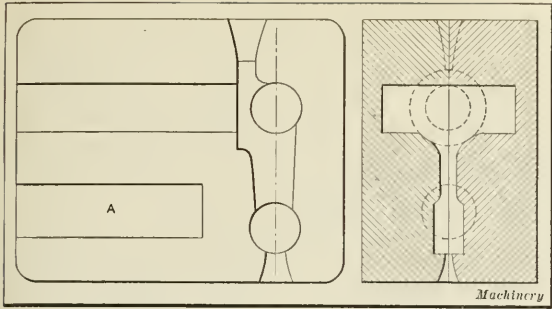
Finishing Dies for Piece shown in Fig. 12
